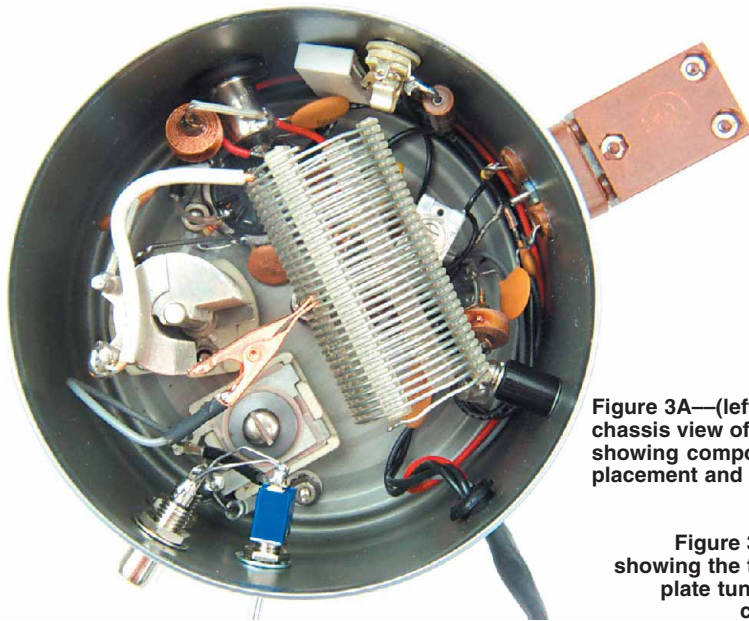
A—(left) A below-chassis view of the T5, showing component placement and parts layout.
